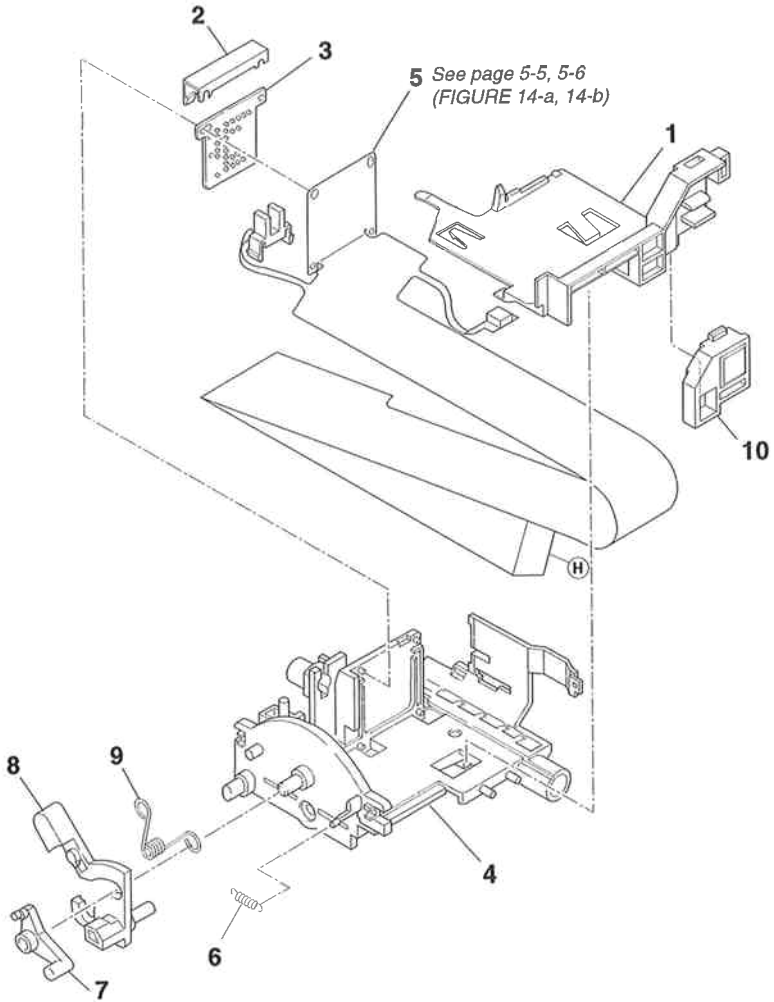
CARRIAGE MOTOR & PAPER FEED MOTOR
